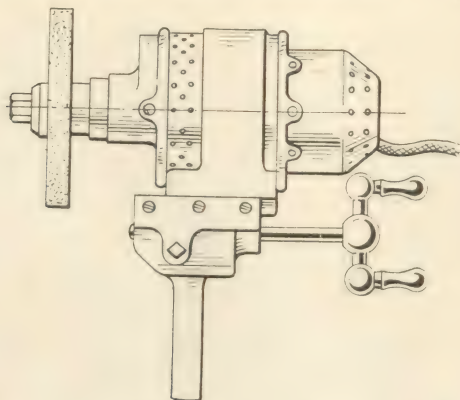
LATHE TOOL POST ELECTRIC GRINDER
